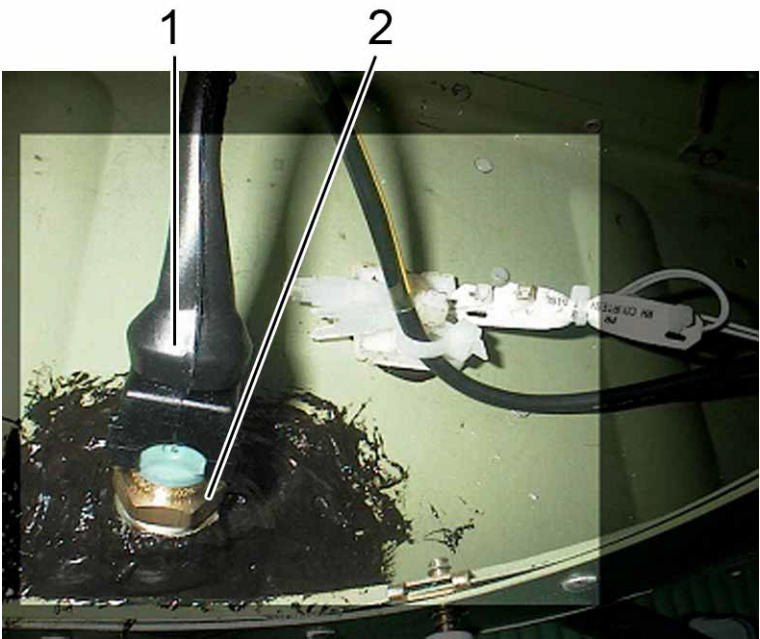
Fuel Temperature Sensor C-172 R,S with TAE 125-01 installation
